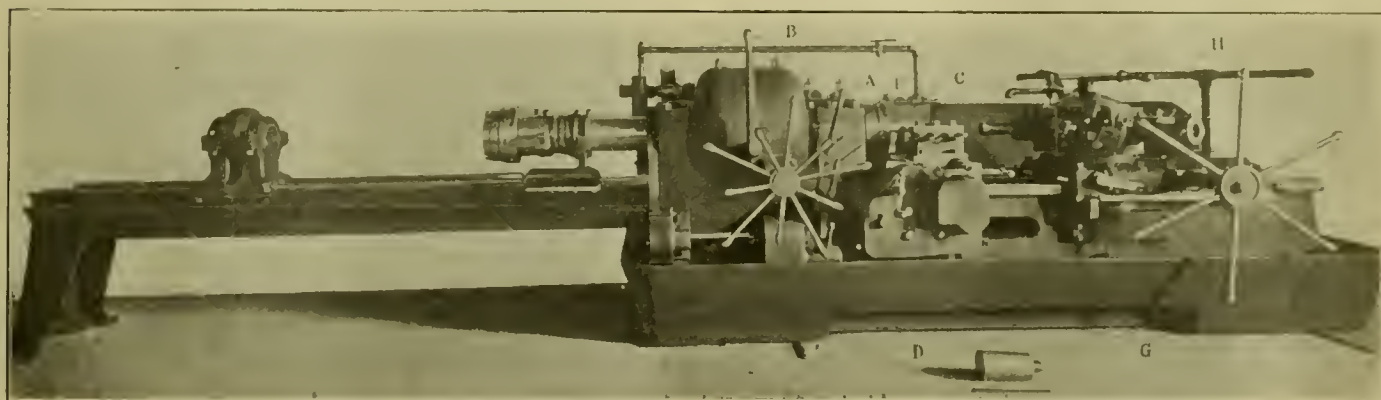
AUTOMATIC CHUCK TURRET LATHE.—BARDONS & OLIVER.
